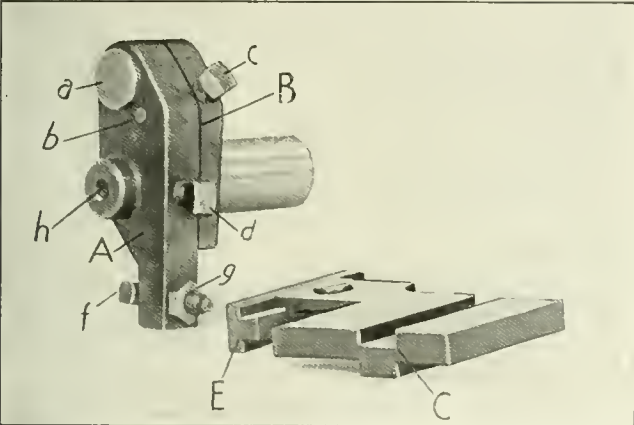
B. & S. Swing Tool-holder and Rising Block for Operating it
